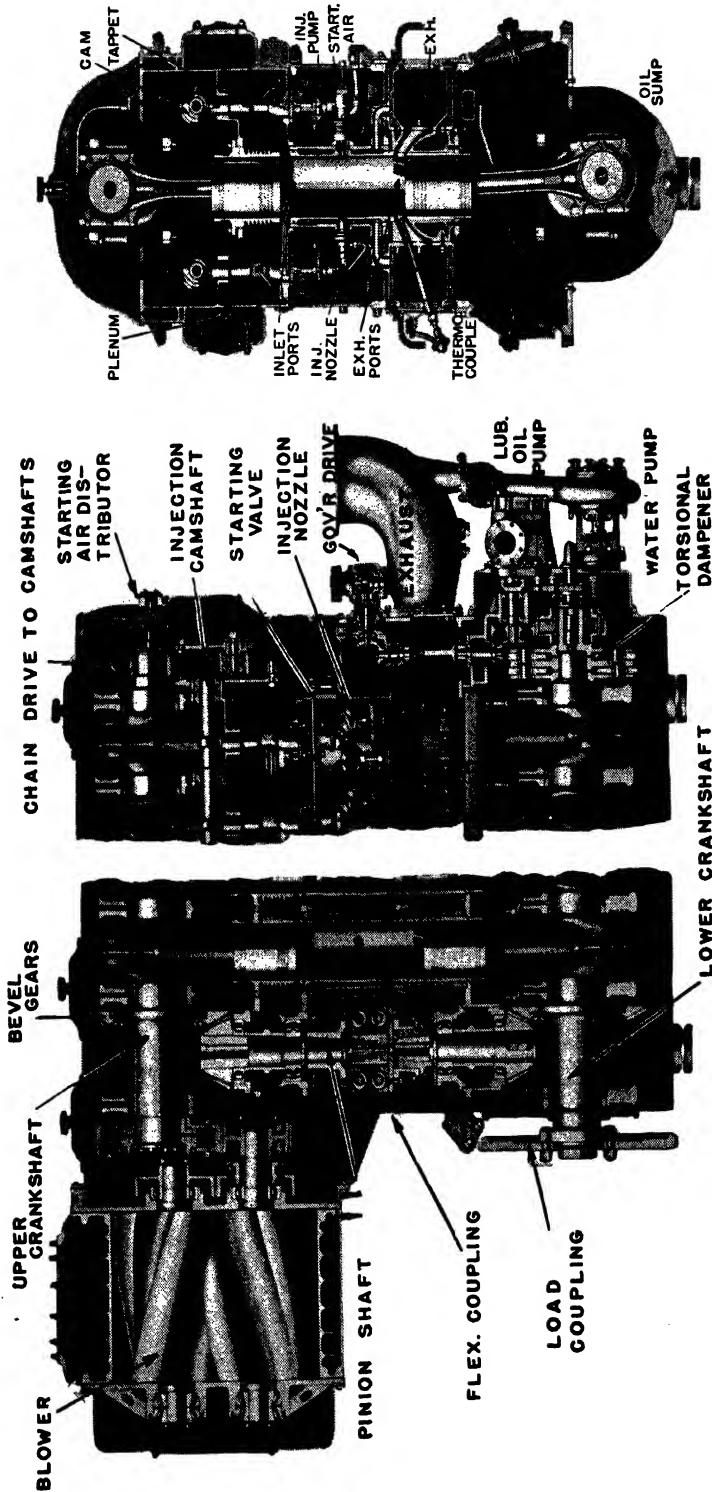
Opposed piston engine. Long- and cross-sections. (Courtesy Fairbanks Morse & Co.,)
